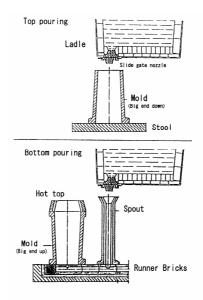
Top pouring and bottom pouring for conventional ingot casting. [Ref. 3] [Big-end-up molds for fully deoxidized steels]
